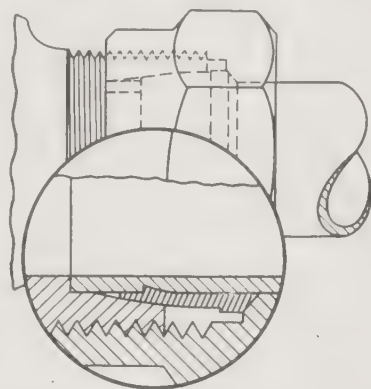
Cone-type Ermeto fitting. (*The Weatherhead Company.*)
